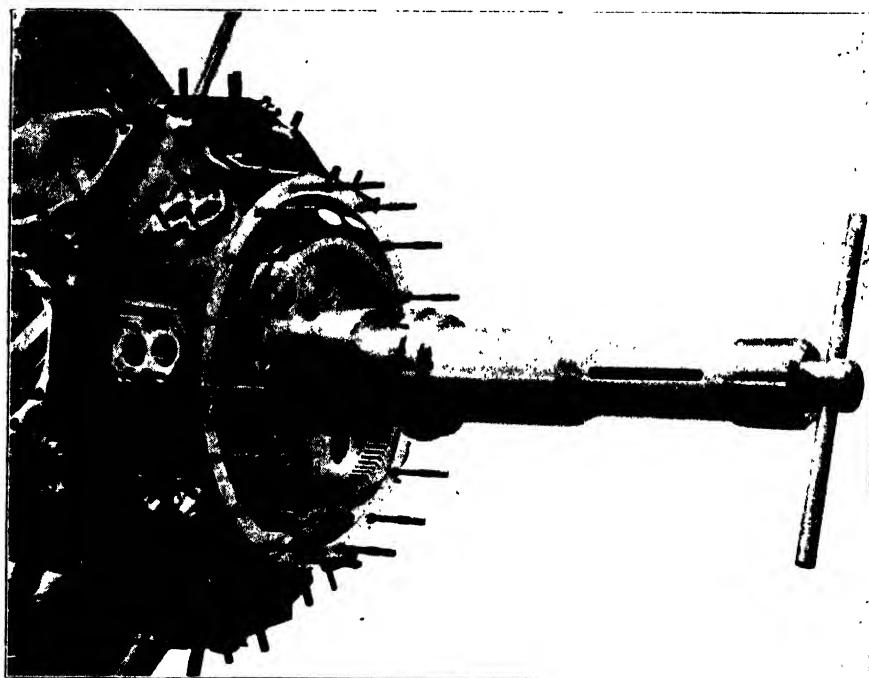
Pressing on Cam Sleeve, with Special Tool.
